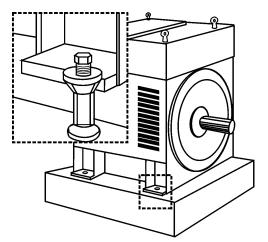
Motor mounted on a concrete base with foundation studs
